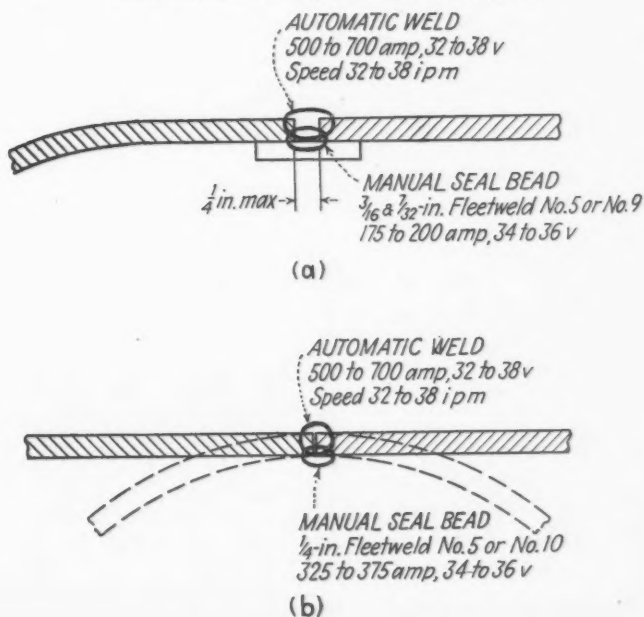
On 3/16 to 1/4-in. plate welding speed is substantially increased and plate edges are square.
